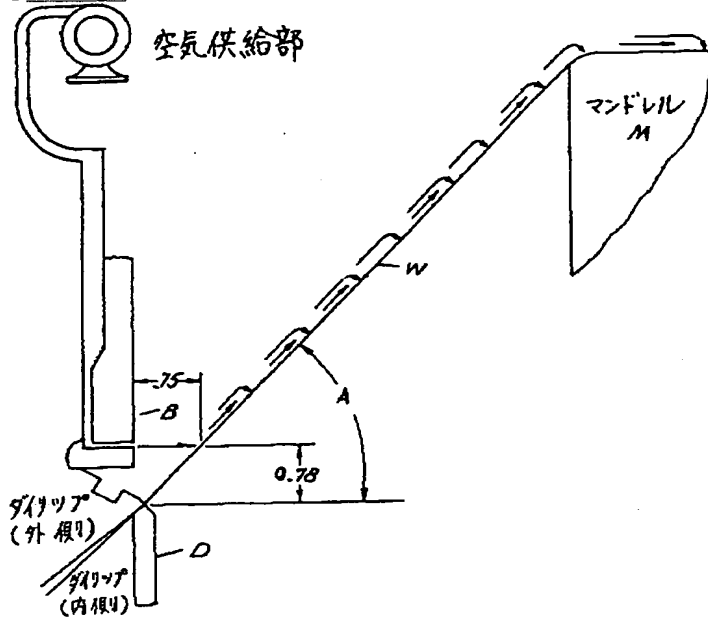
is the schematic drawing of the take-up motion used by the downstream of this equipment for launching.
